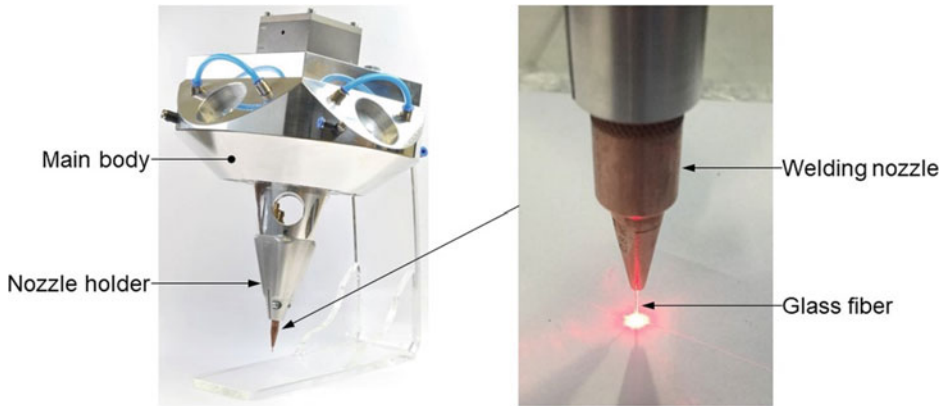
Coaxial multi-wavelength processing head (left) and close up of its welding nozzle with a fused silica fiber and a red laser pointer showing (right) [28, 50]
